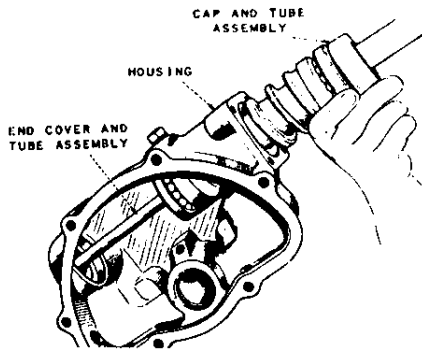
REMOVING CAM AND TUBE ASSEMBLY
